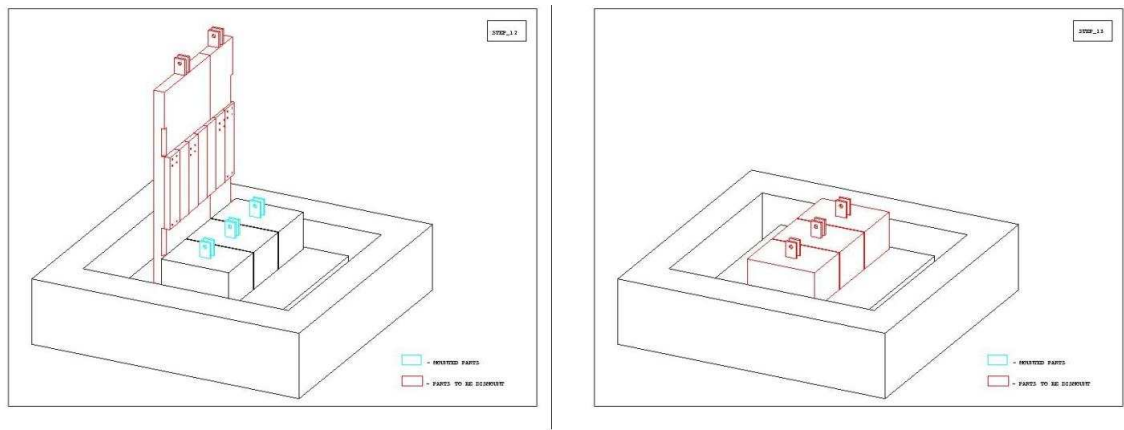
SM3 Analysis Magnet Assembly Steps 13 (left) and 14 (right)
